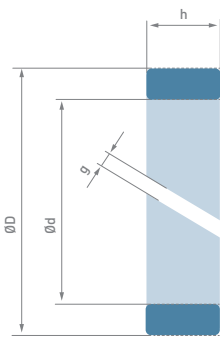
Cross section of the Piston Guiding Ring Fig. 2 Cross-section of the installation situation
